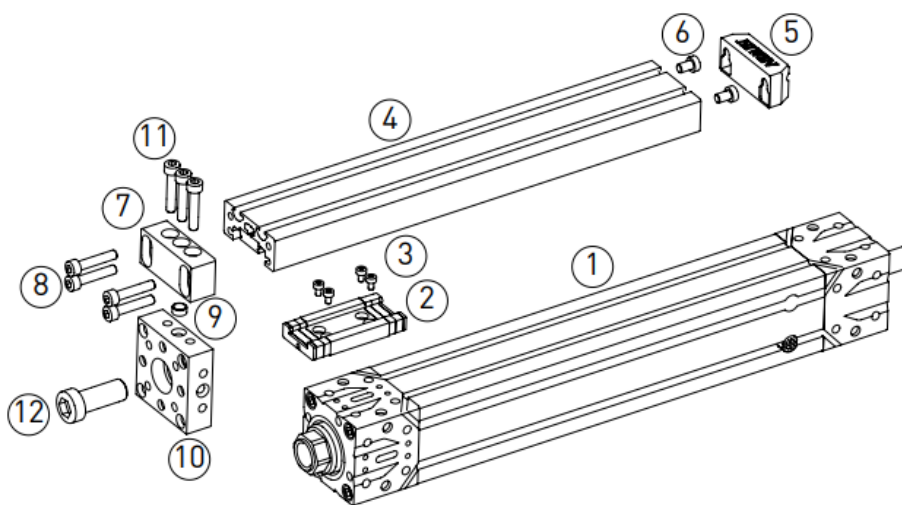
Mounting the cover for belt drive with swivel flange
